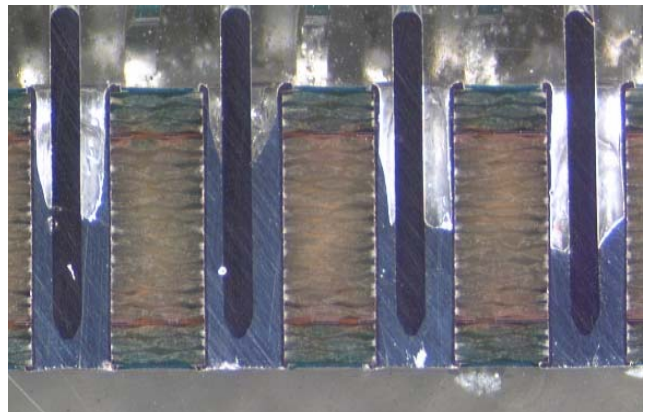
C. PCI Lead Protrusion on the 135mil Thick Card.
